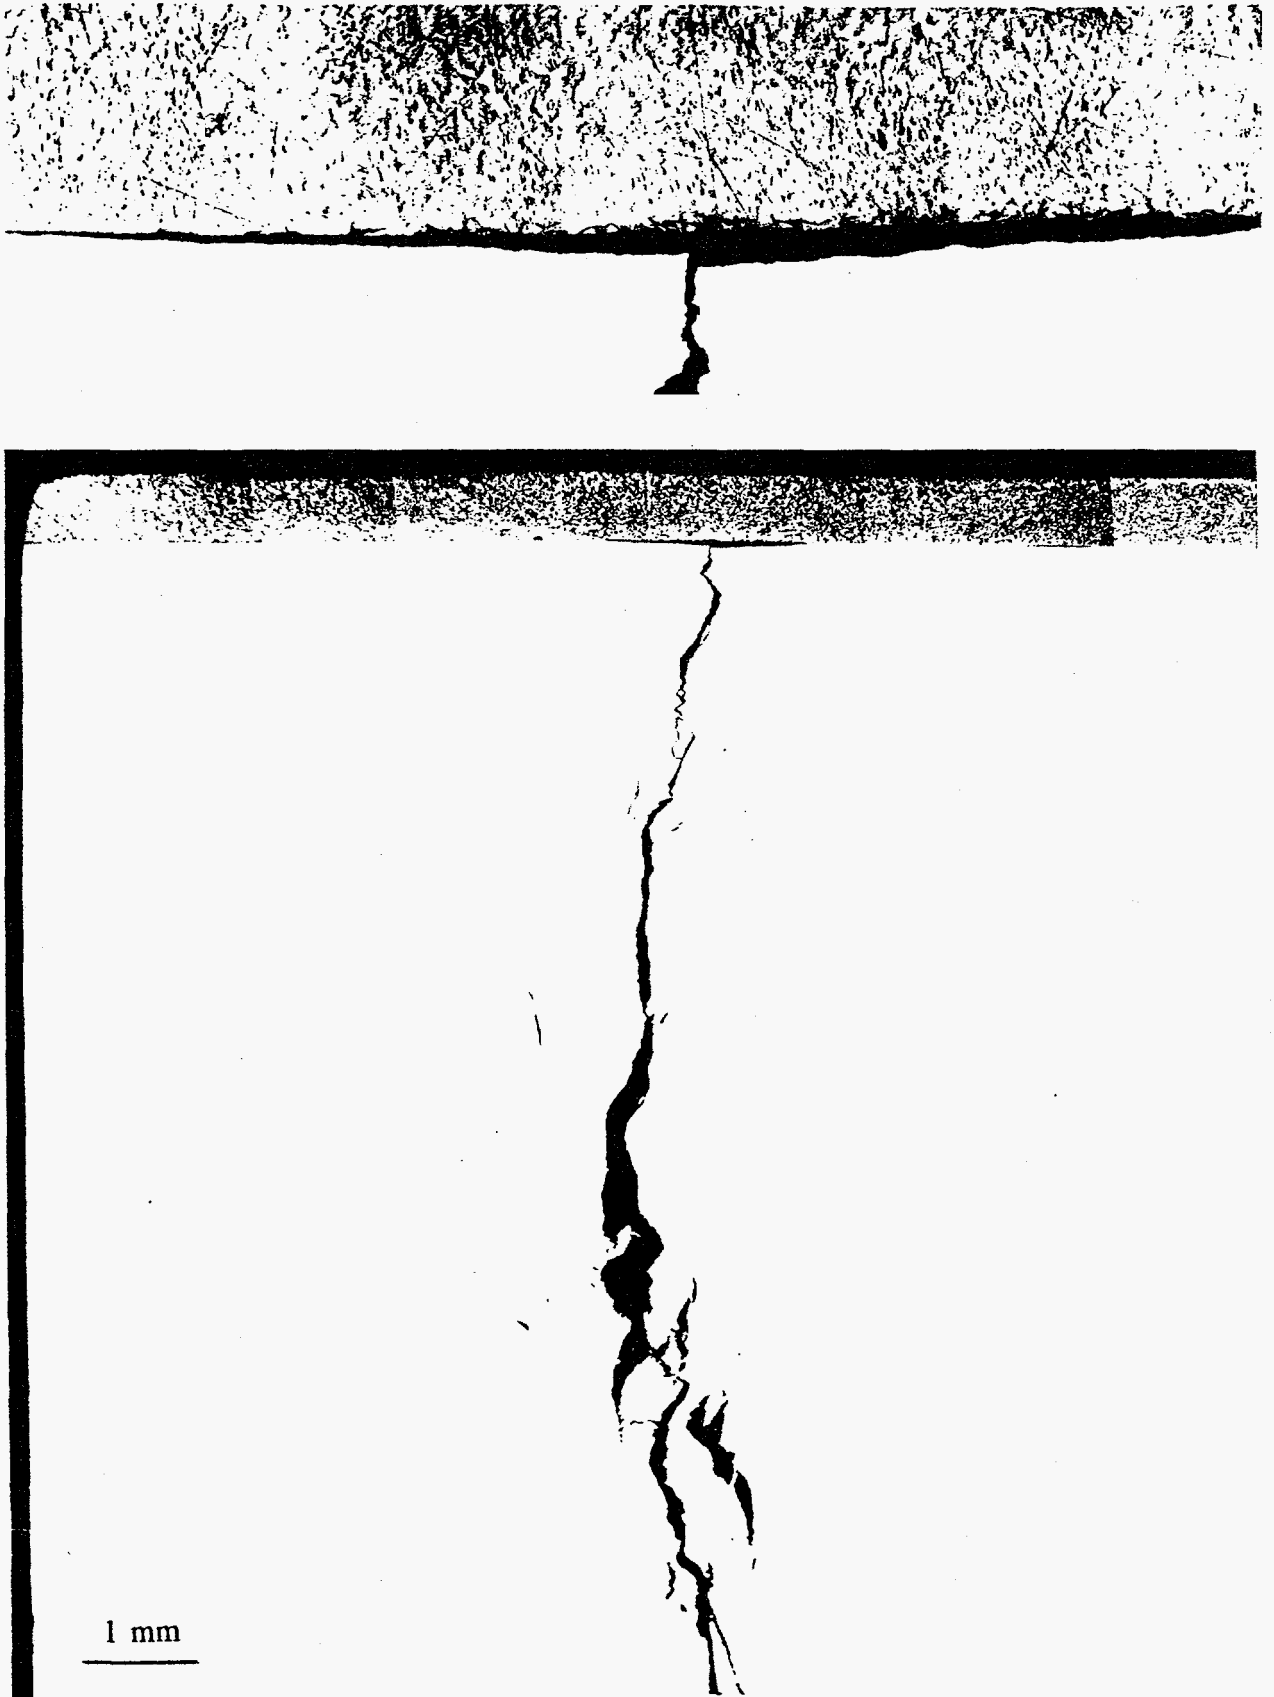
Intersection of a Crack in the Core Material with the Cladding, Disk #2.
